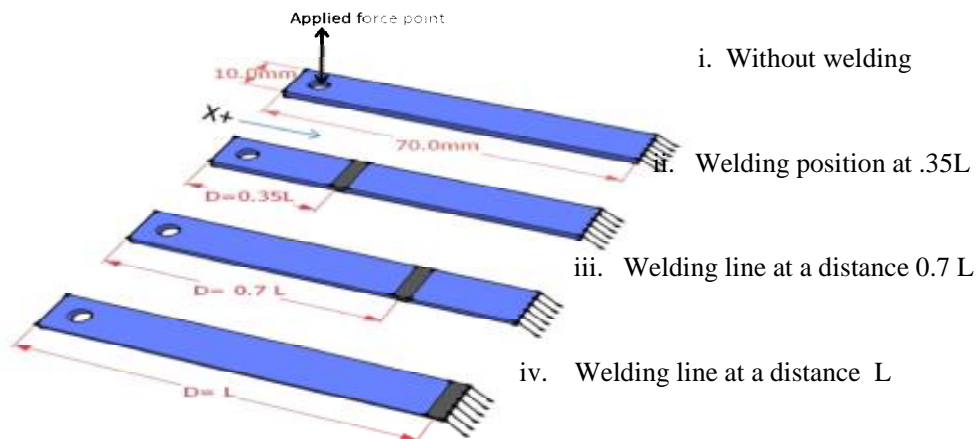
Fatigue test samples with welding line at different positions.
